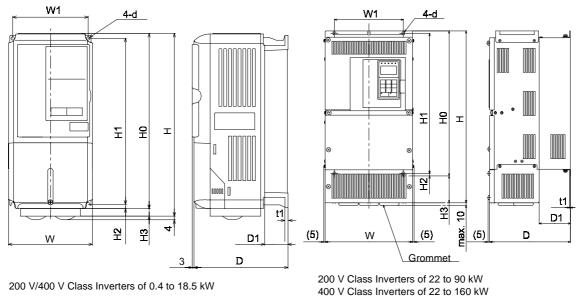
Exterior Diagrams of Enclosed Wall-mounted Inverters
